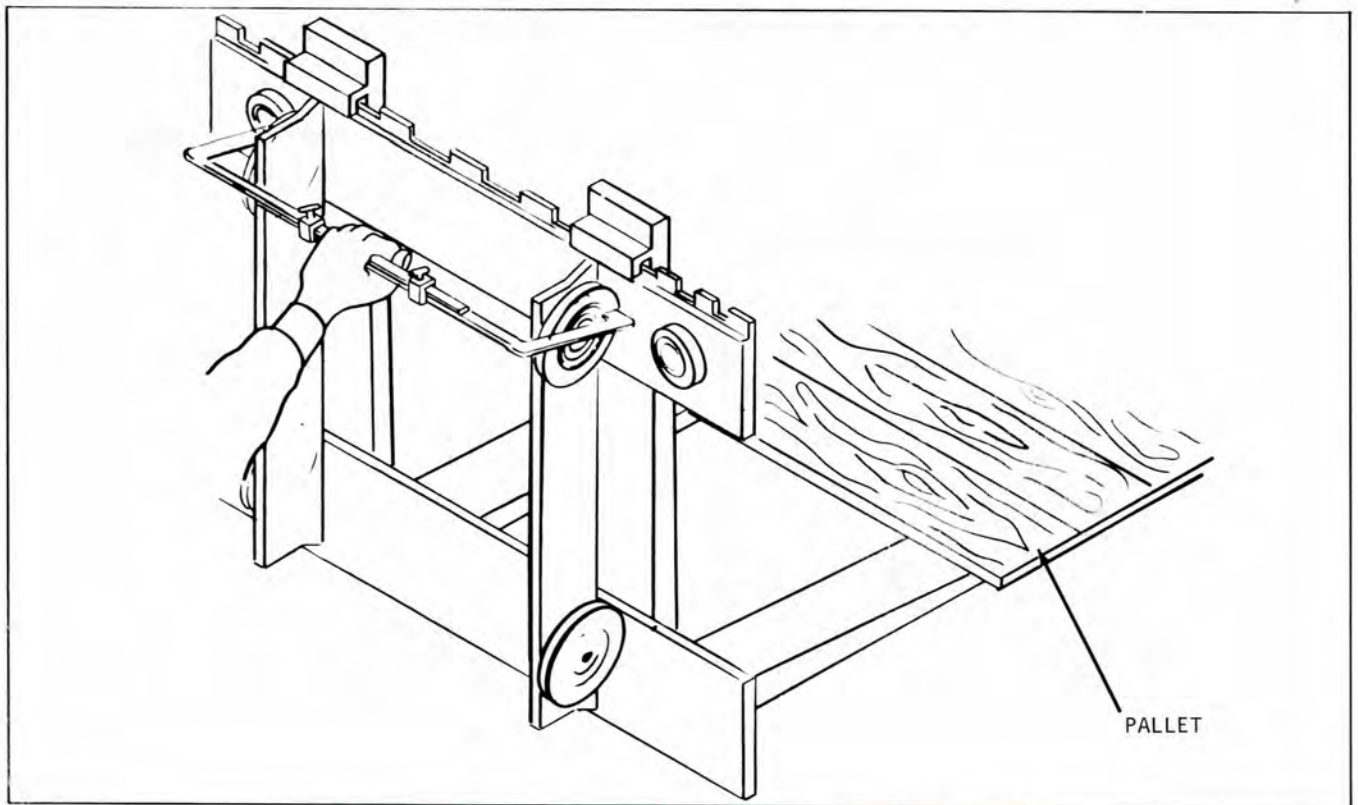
Spanning Upper Rollers (Four Roller Carriage)
